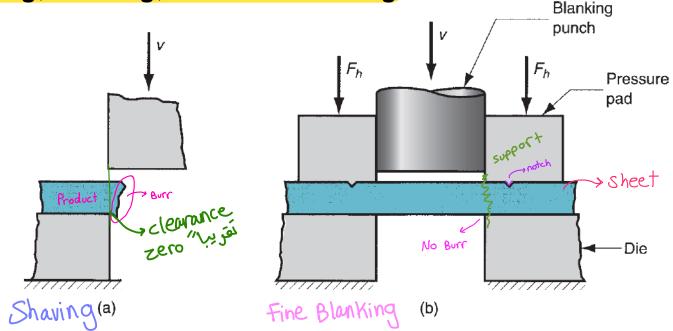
(a) Shaving (to cut unsmooth edges and get accurate dimensions) and (b) fine blanking (gives close tolerance and smooth, straight edges).
